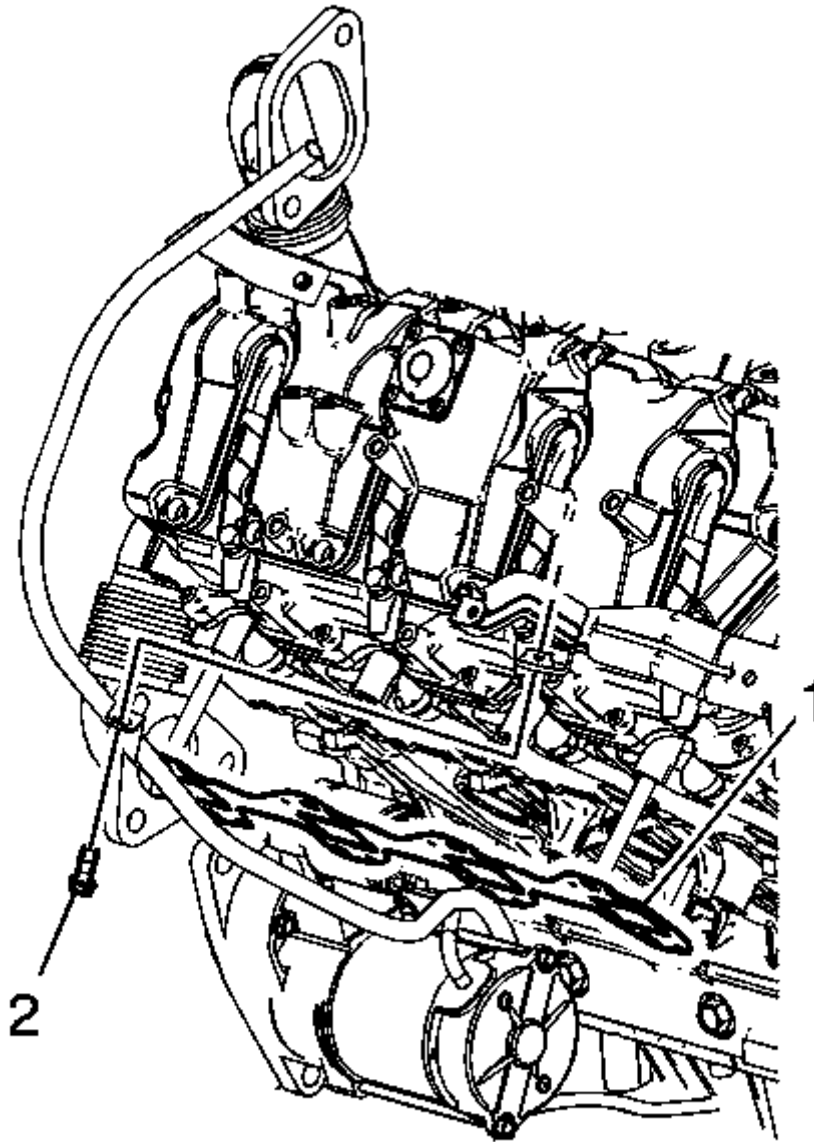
View Of Oil Level Indicator Tube Bolt & Manifold Gasket
